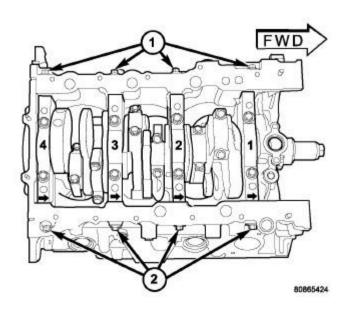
Main Bearing Cap Identification Courtesy of CHRYSLER LLC
